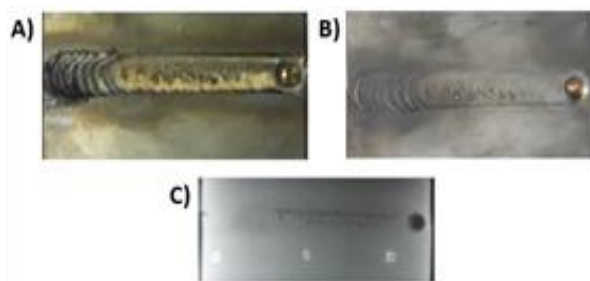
, Specimen 1, welded by FSW process, a) Visual appearance with flash, b) Visual appearance without flash, c) Radiography.
